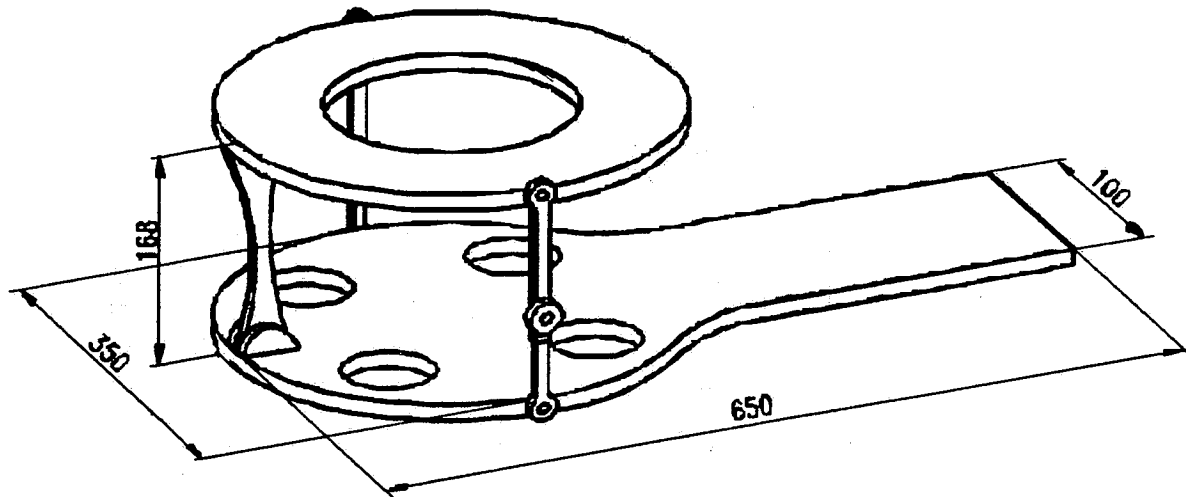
Suggested linkage arrangement constraining loading pad
